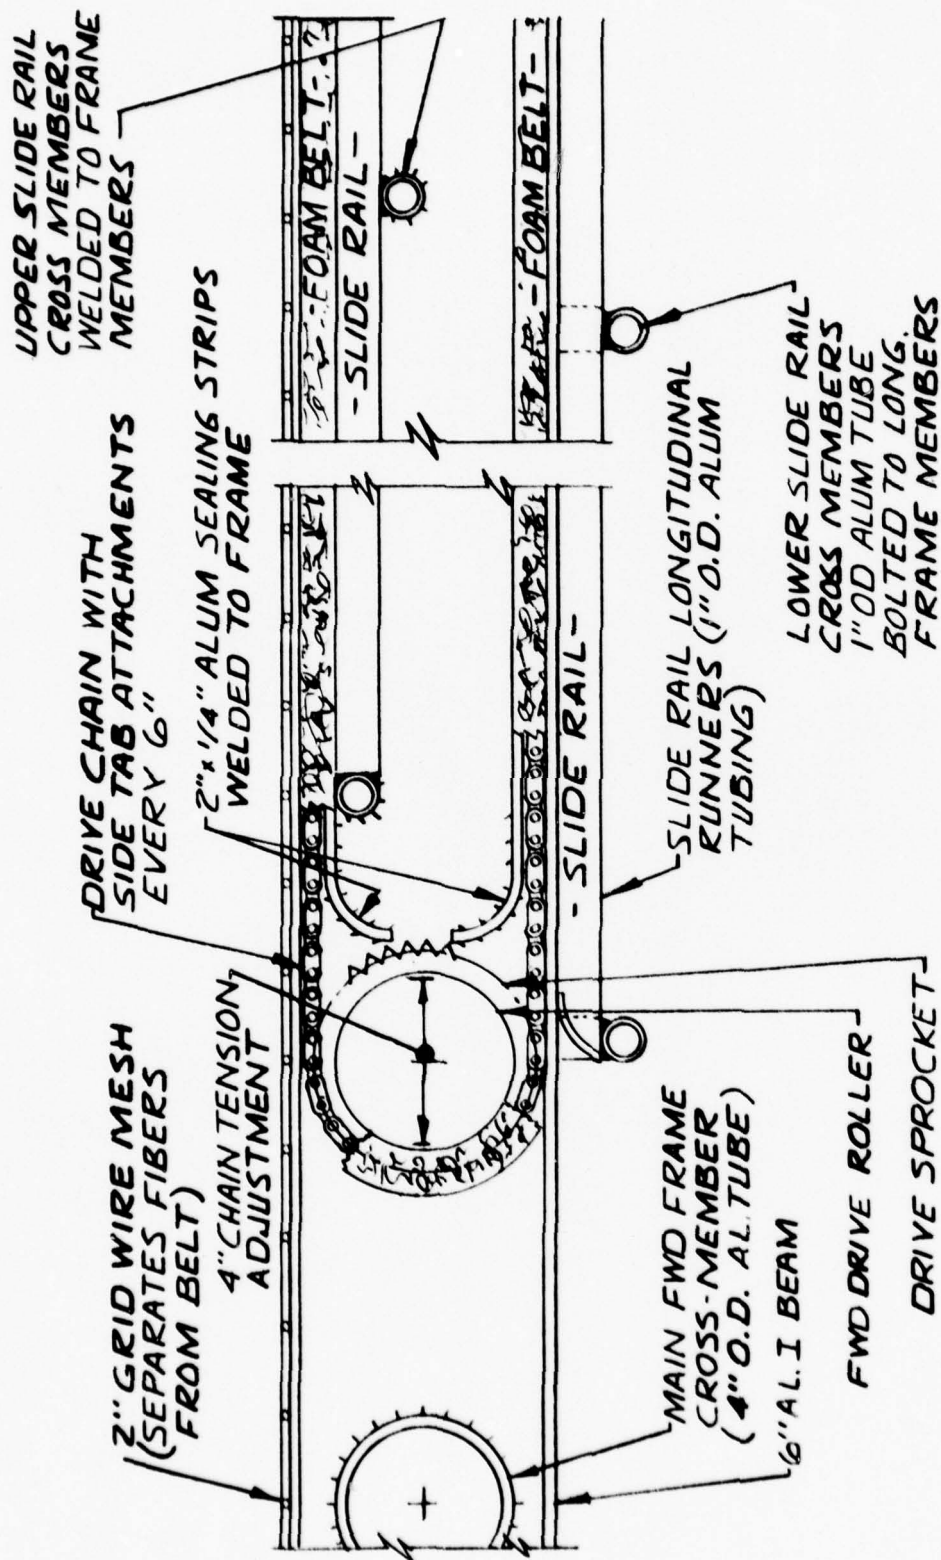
BELT SYSTEM (SIDE VIEW CUTAWAY)
